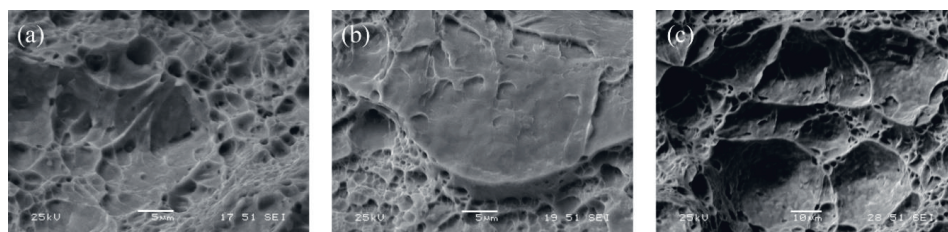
Fracture surface after tensile test of following samples; (a) S(540, 5), shows ductile fracture of HAZ (b) S(640, 50), shows brittle fracture of HAZ and (c) reference weld.
